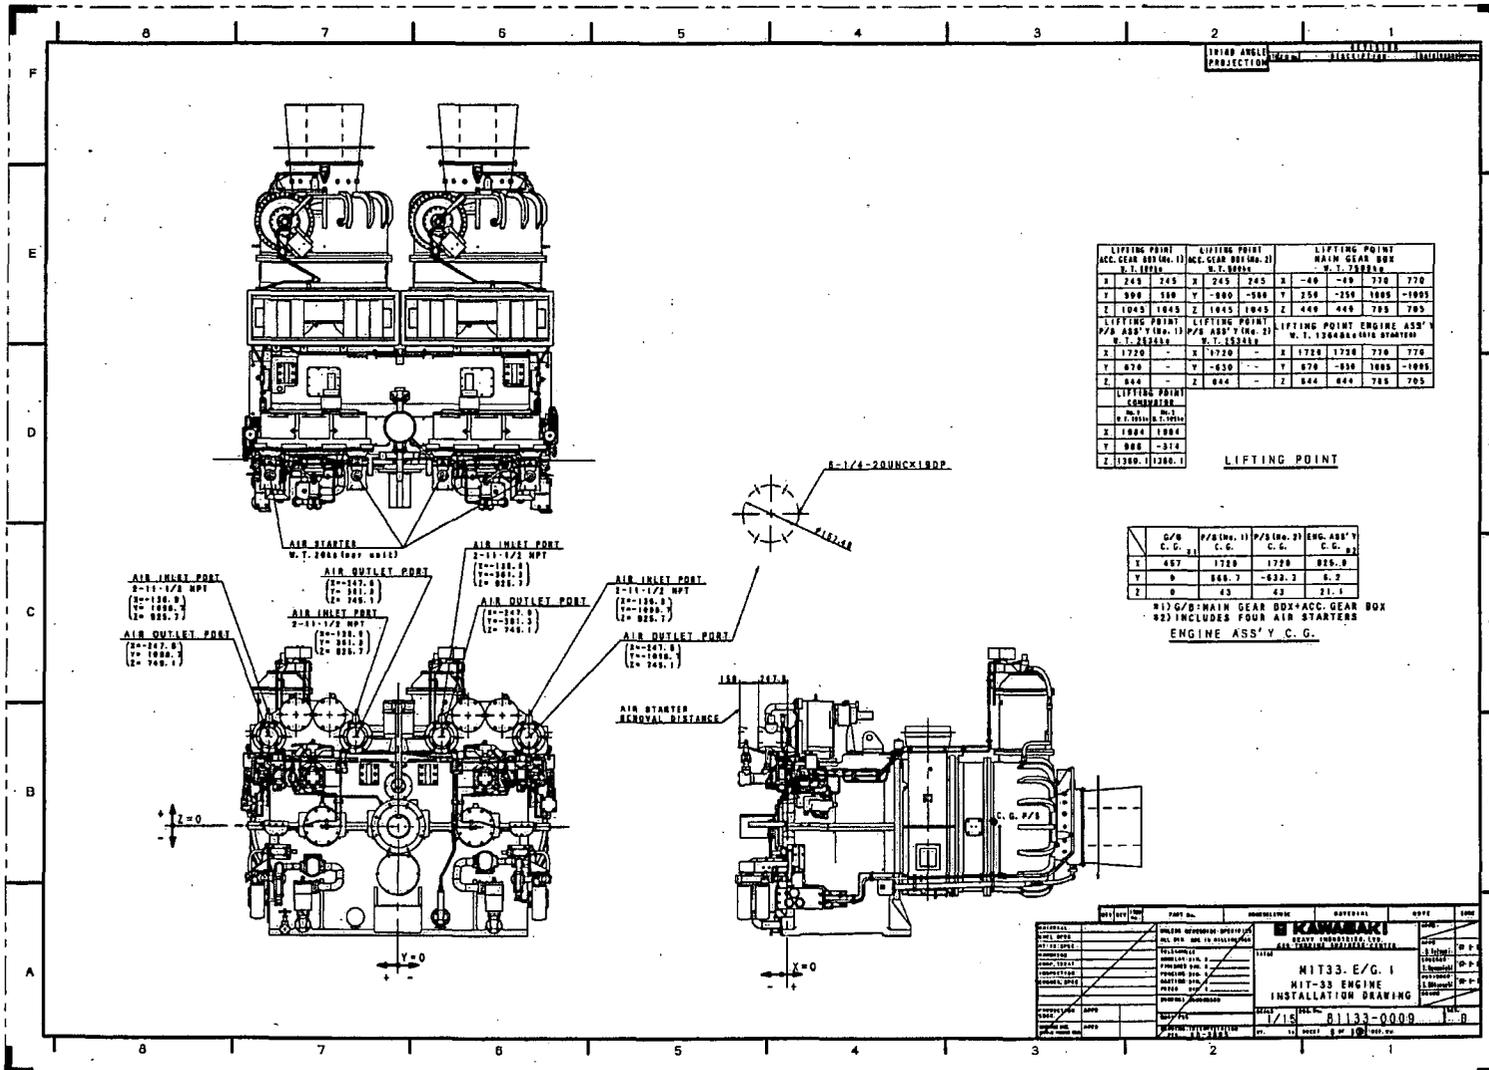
Installation Drawing of Gas Turbine Assembly (sheet 6)
